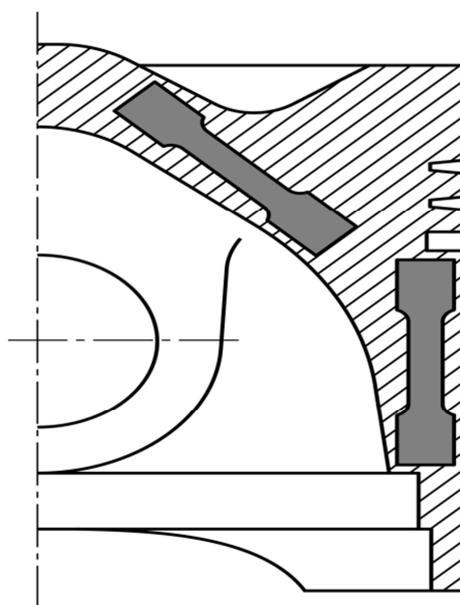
Sketch of piston with marked sites for cut of the specimens
